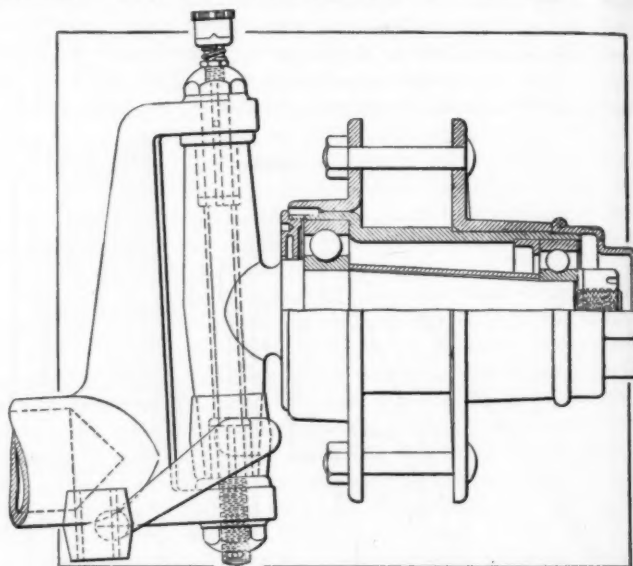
Front wheel hub with annular ball bearings in which the center of the wheel is too far from the center of the knuckle pin
